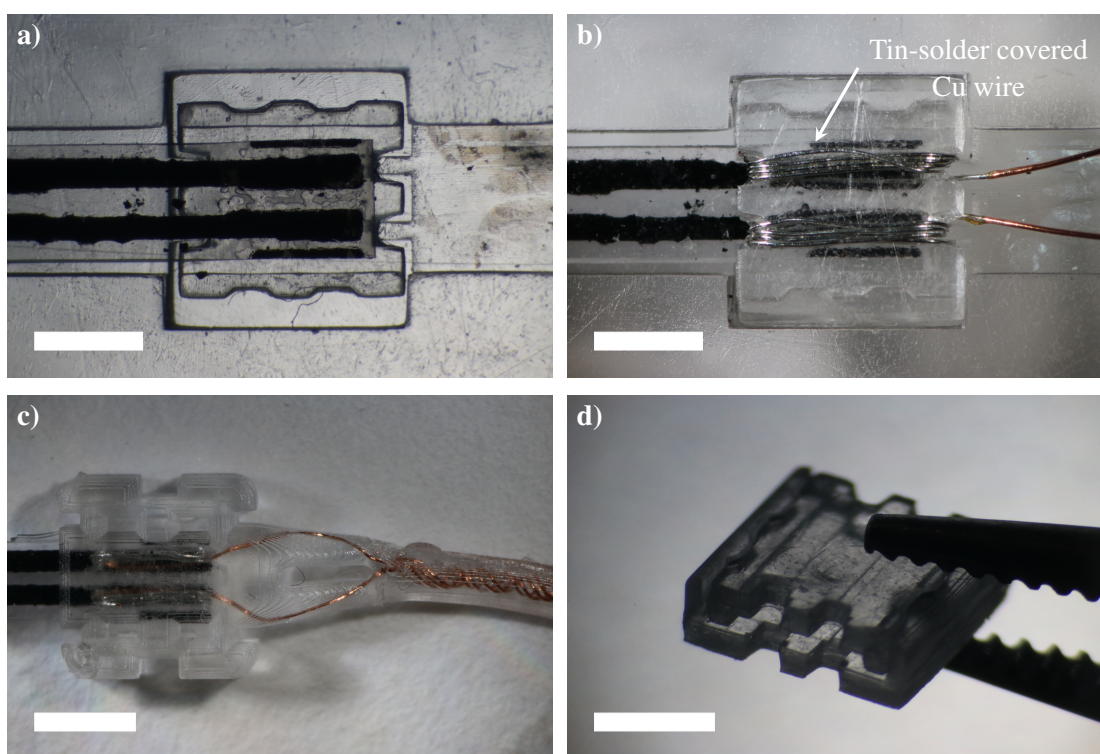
a) The smaller half of the Cu-CNT-clip is placed inside a 3D printed alignment aiding structure and the rear end of a CNT/PDMS electrode array is placed on top of it with the contact pads facing upwards. Scale bar is 2 mm. b) Tin solder coated tips of PTFE coated 100 μm thick Cu-wires are wrapped around the larger Cu-CNT-clip half which is placed onto the smaller Cu-CNT-clip half. Scale bar is 2 mm. c) The Cu-CNT-clip forming the electrical connection between the CNT contact pads and the Cu wires is encapsulated with silicone. Scale bar is 3 mm. d) A freestanding Cu-CNT-clip. Scale bar is 2 mm.
